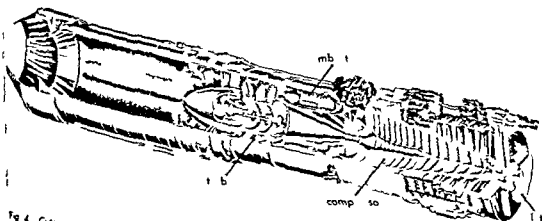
Cutaway view of turbojet engine (G. I. Elmer)
